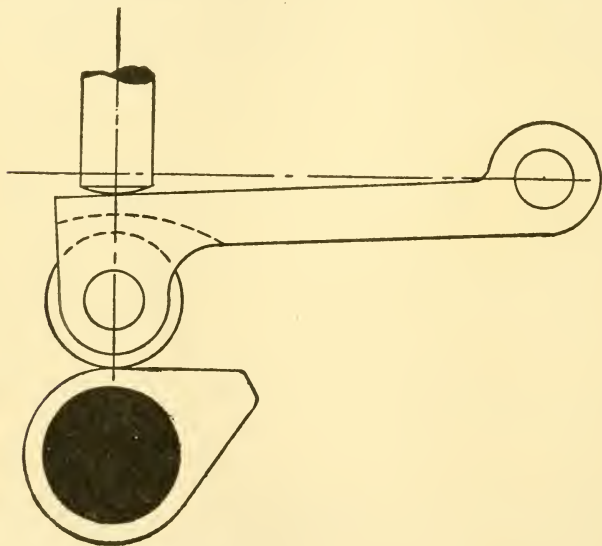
Valve cam device with roller mounted on carrier. This design is frequently used to reduce the side thrust upon the push rod.
